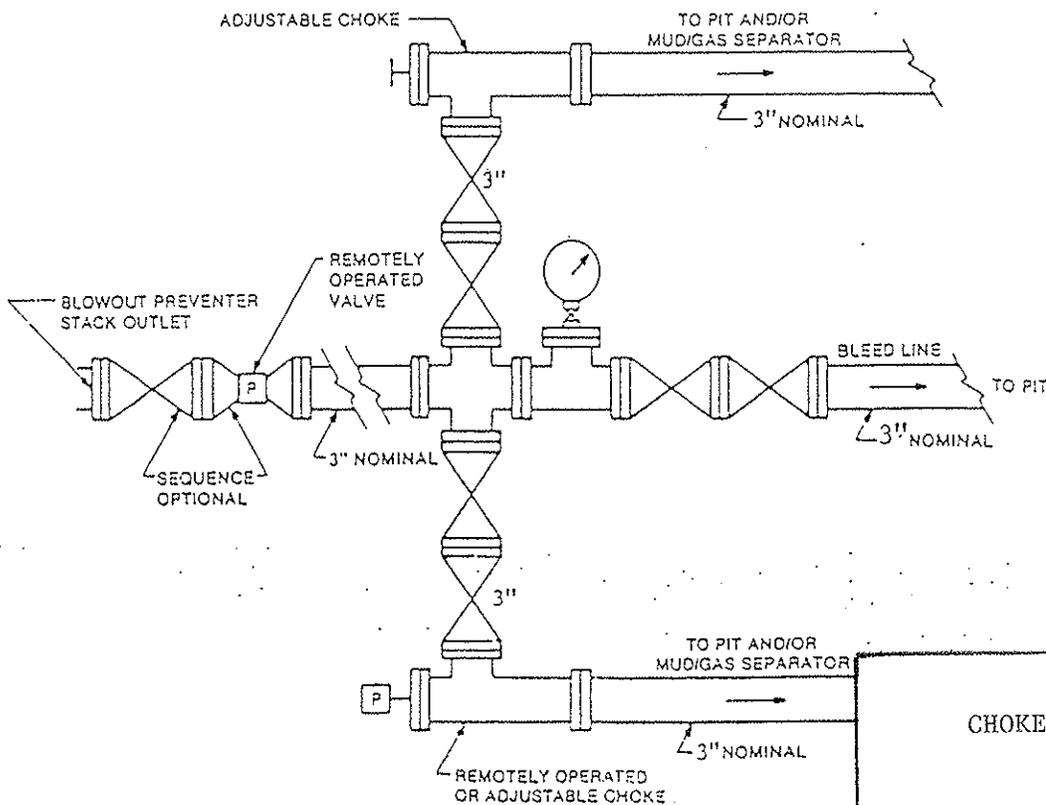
Typical choke manifold assembly for SM rated work pressure service — surface installation.
